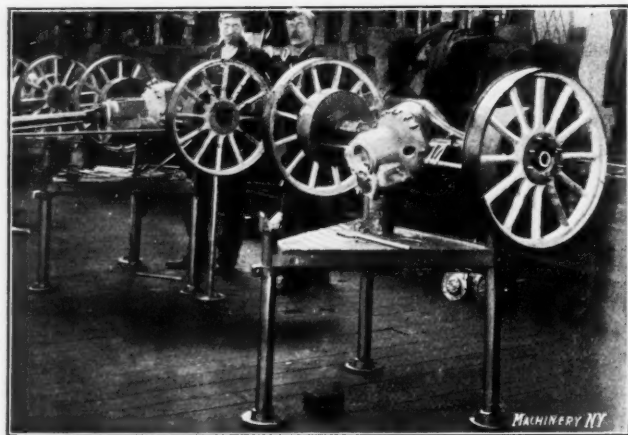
Apparatus for Testing Rear Axle Mechanism
